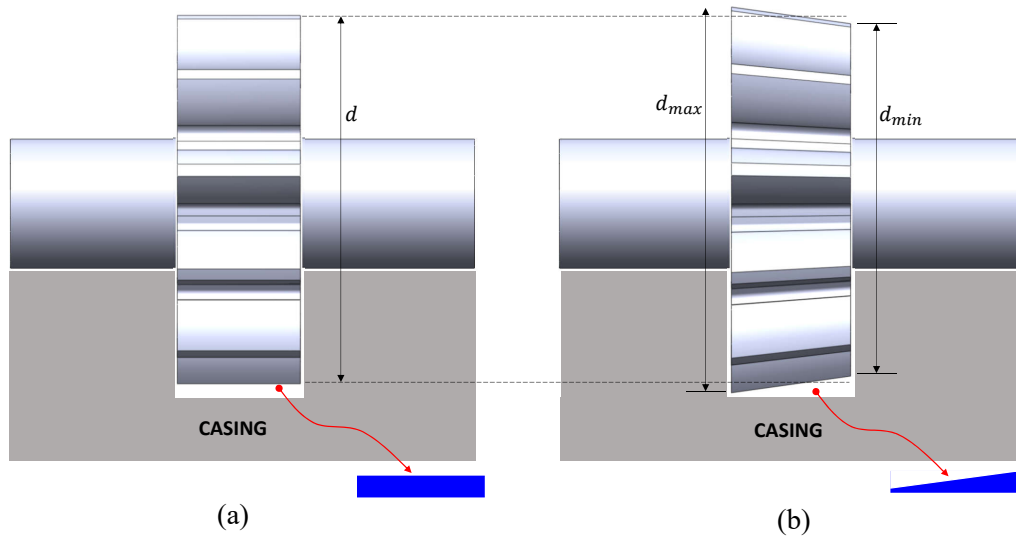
Illustration of gear conicity: (a) perfect gear (b) gear with conicity. The blue quadrilateral shows the cross section view of clearance path at a tooth tip.
